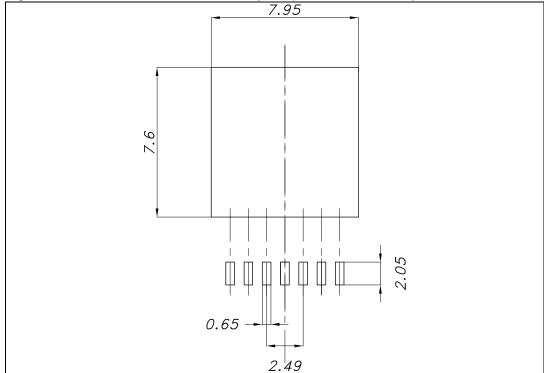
H²PAK-6 recommended footprint (dimensions in mm)
